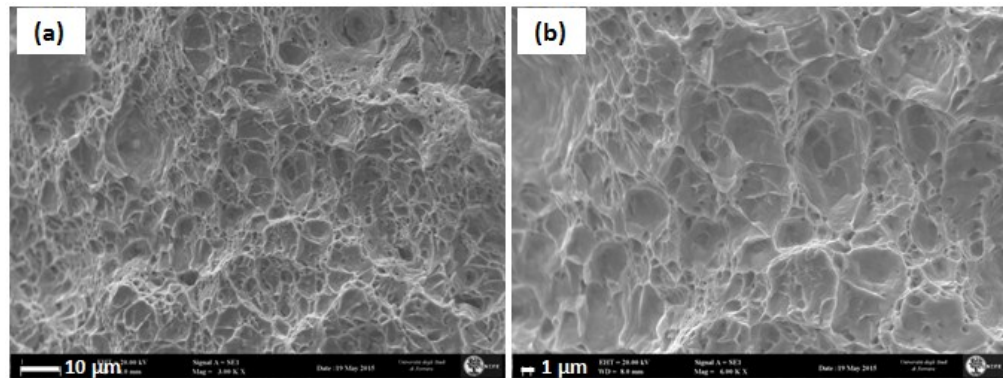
Fracture surface of the sample FN2P
